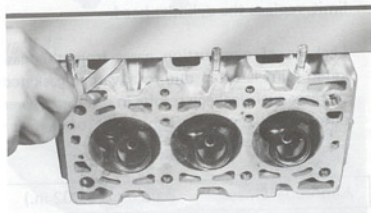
Checking exhaust manifold seating face for flatness.
